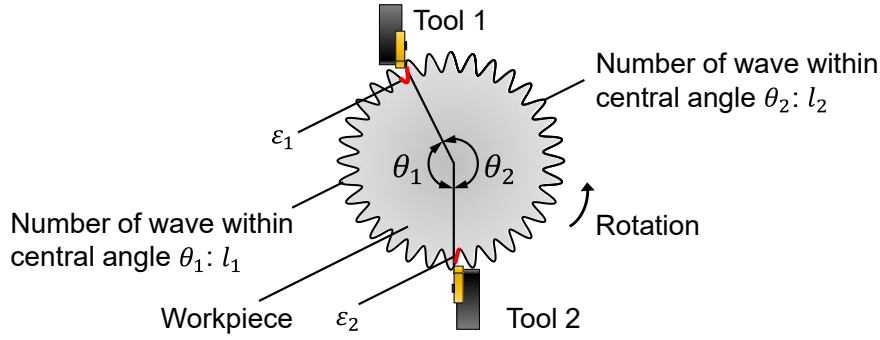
Schematic of wavy surface left on machined workpiece
